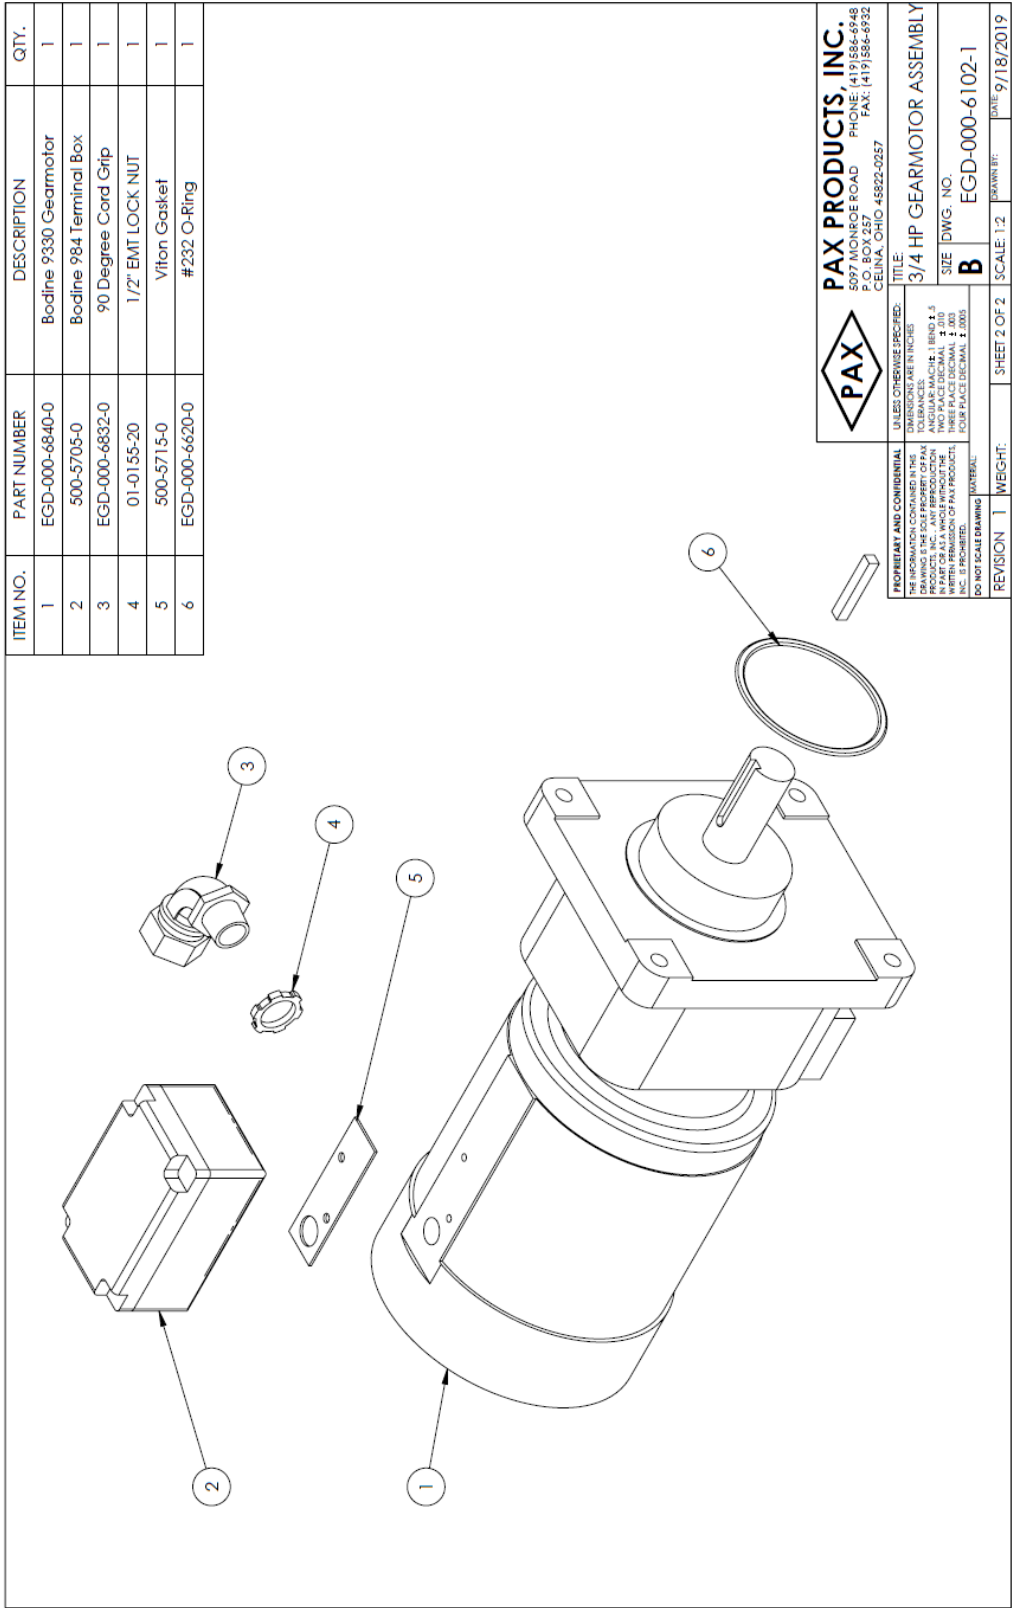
EGD-250 ¾ HP GEARMOTOR ASSEMBLY
